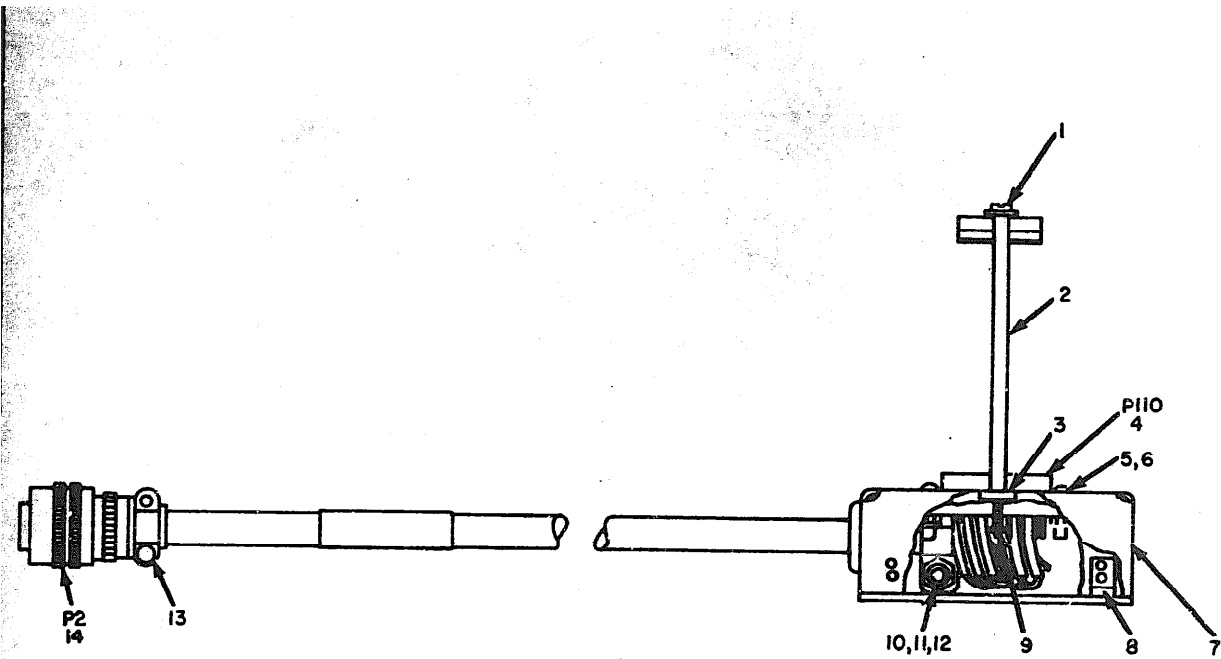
Cable Assembly, Special Purpose, Electrical, CX-7562/ASM-63 998930-01-01 (W12).
